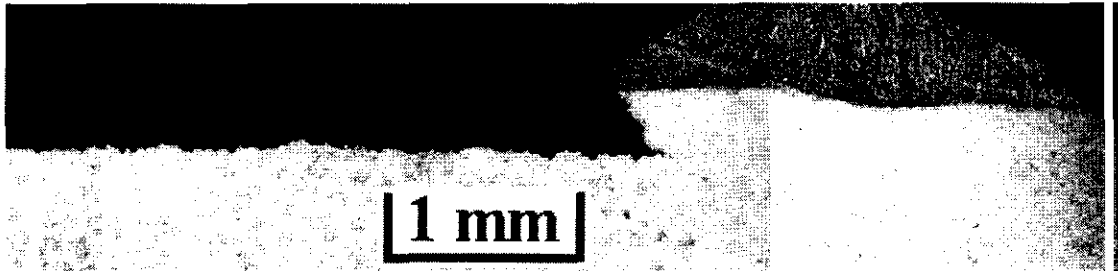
Crack propagating in the HAZ of the casting.
